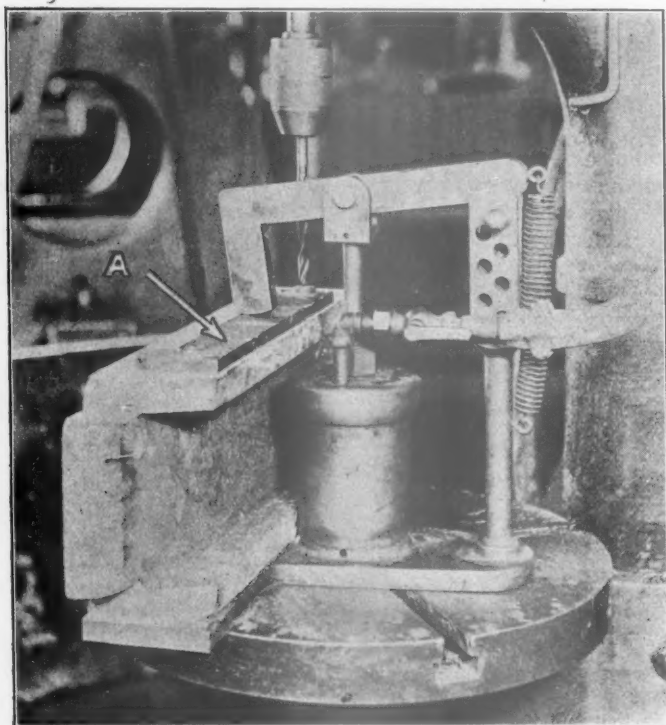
Jig Used When Drilling 3/8-In. Location Holes
